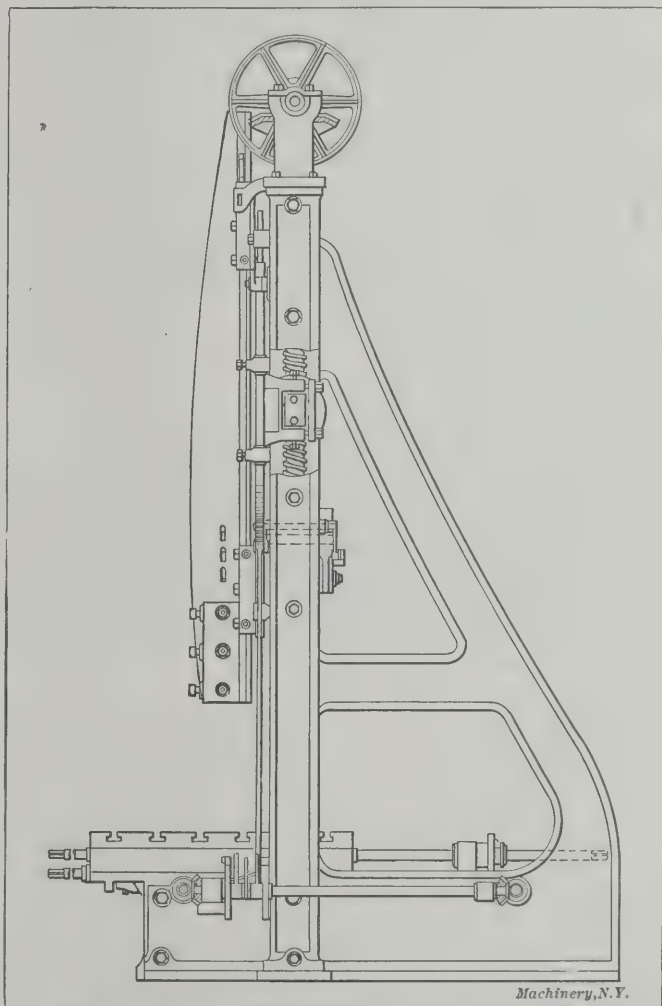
Early Self-acting Slotting Machine, Screw-driven. Side Elevation.
